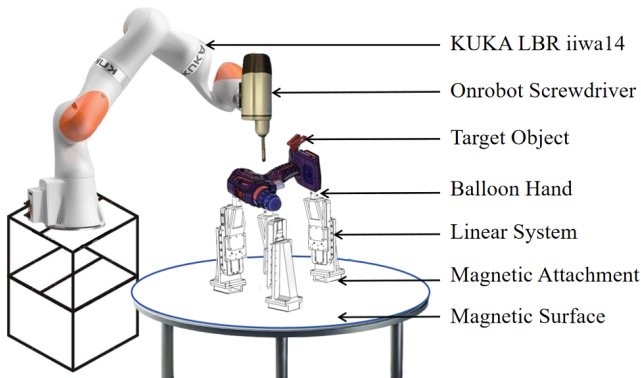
Overview of the robotic disassembly system consisting of a KUKA LBR iiwa14 arm, Onrobot screwdriver, balloon-hand-based support system, and magnetic attachments for fixture stabilization.
